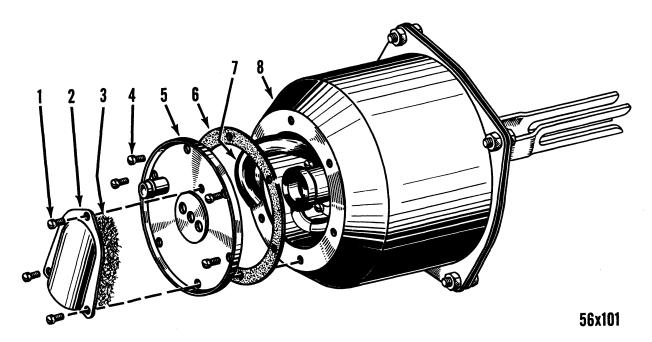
Assembly of Air Cleaner, Tube and Plate to Vacuum Cylinder
